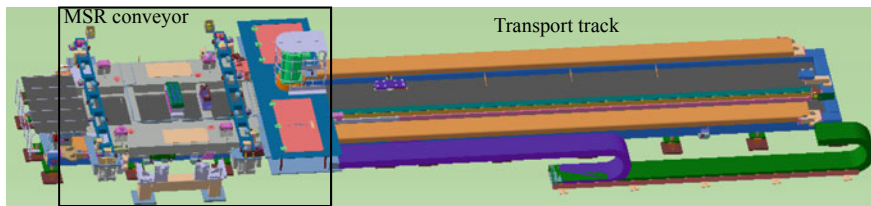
Rear floor transport track and MSR conveyor design drawing
